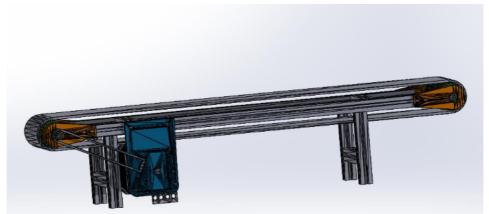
Model of a conveyor belt as an assembly in SolidWorks
